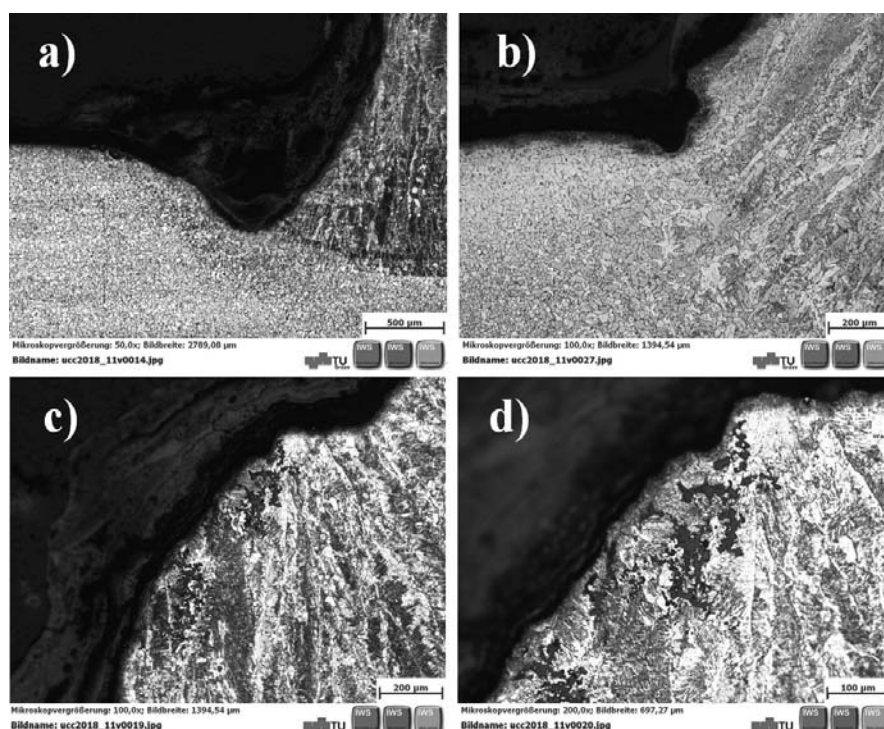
Welded steel-joint details – cross sections in LOM/corrosion after the 480 h NSS test/local corrosion at the fusion line: a) DD11; b) DD13; c and d) G3Si1 weld metal
